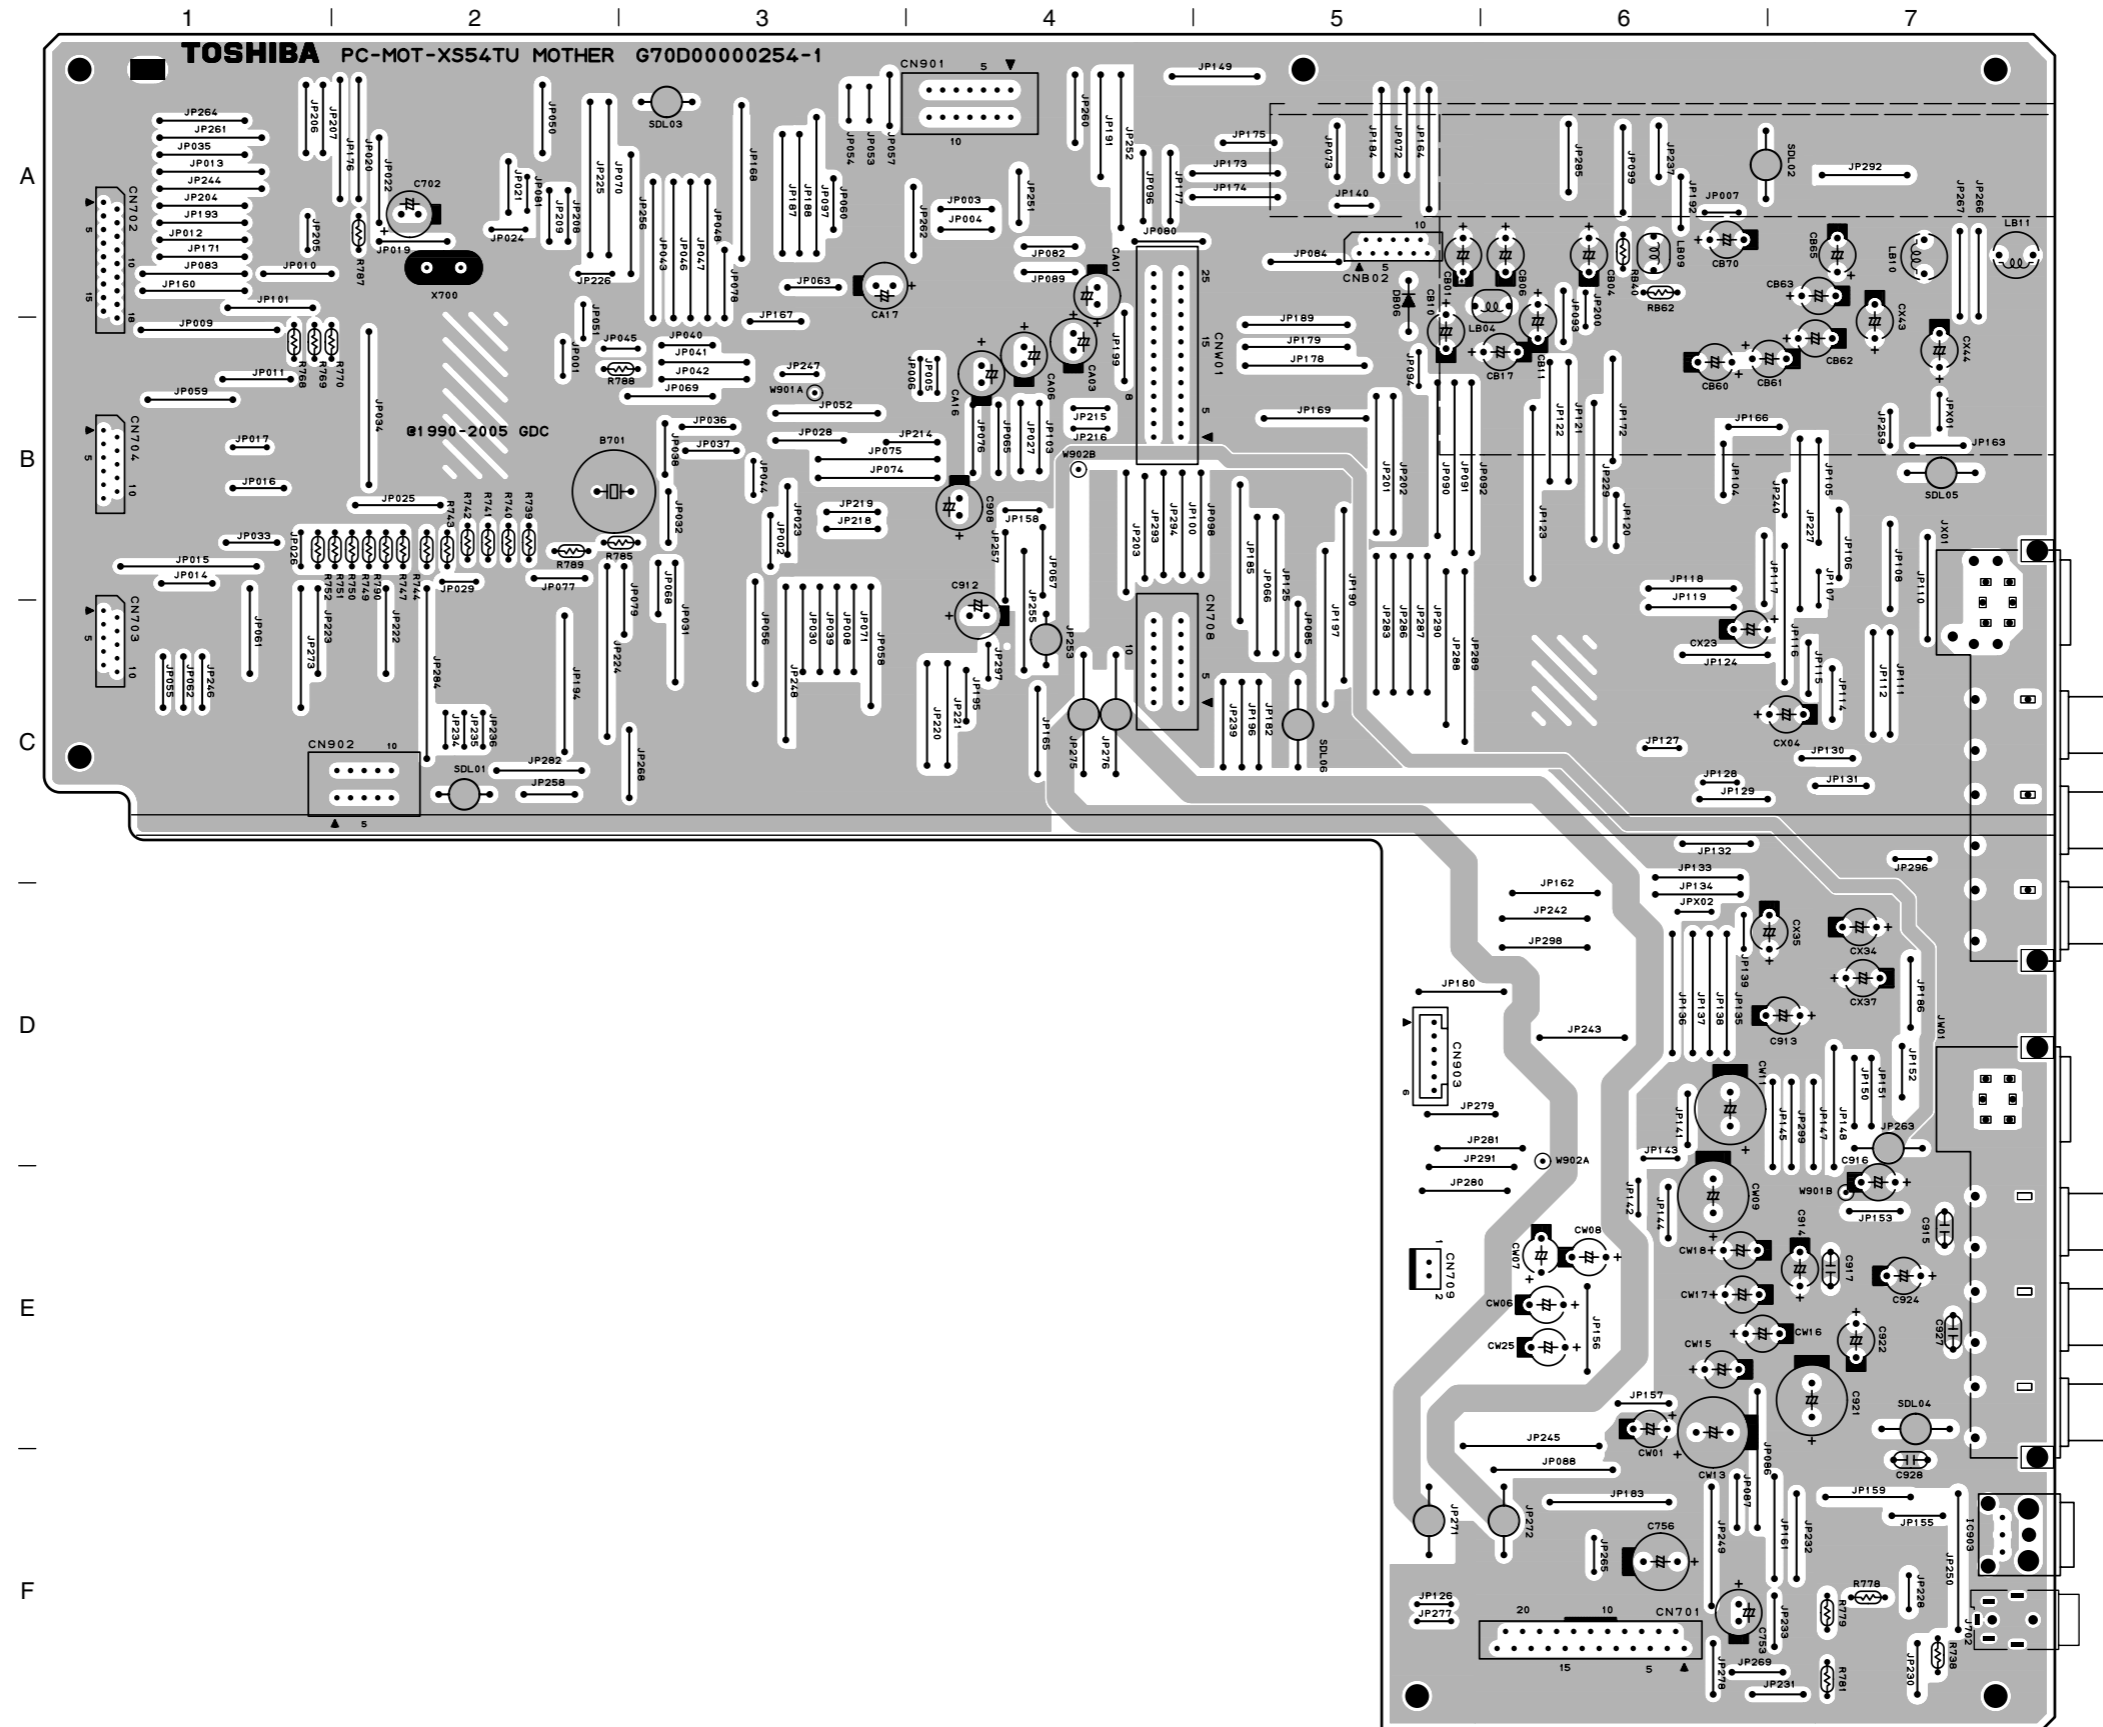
EU05 Mother PC Board (Top side)
